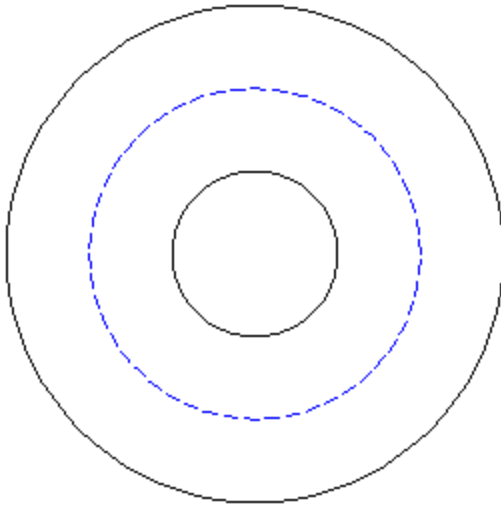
illustrates face/end view of the above shaft looking at origin point. Insertion point is the center of the shaft diameter. Tool & Die Helper For AutoCAD LT will automatically draw hidden shaft diameters on user specified hidden line layer.
